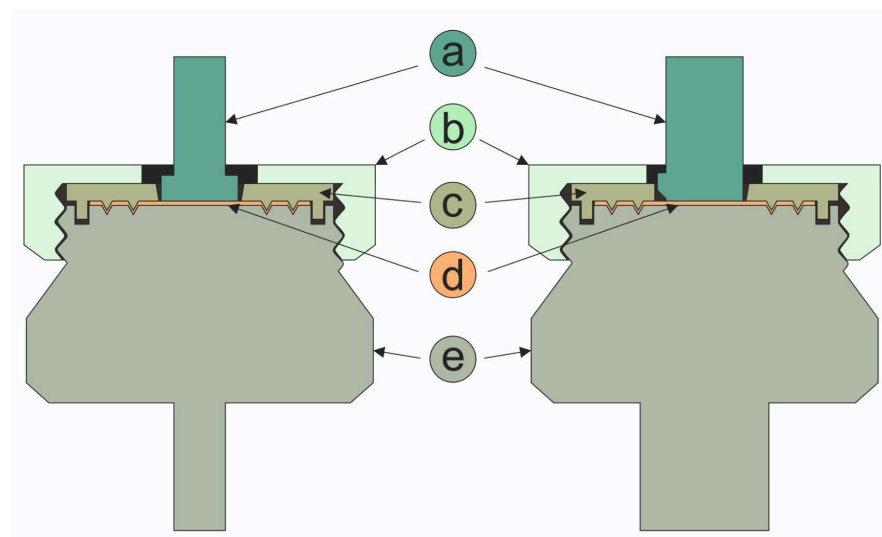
Front and side section of the perpendicular tensile testing fixture. Labelled components: (a) printed dolly; (b) threaded cap; (c) fixing/indexing plate; (d) textile substrate; (e) threaded support body.
